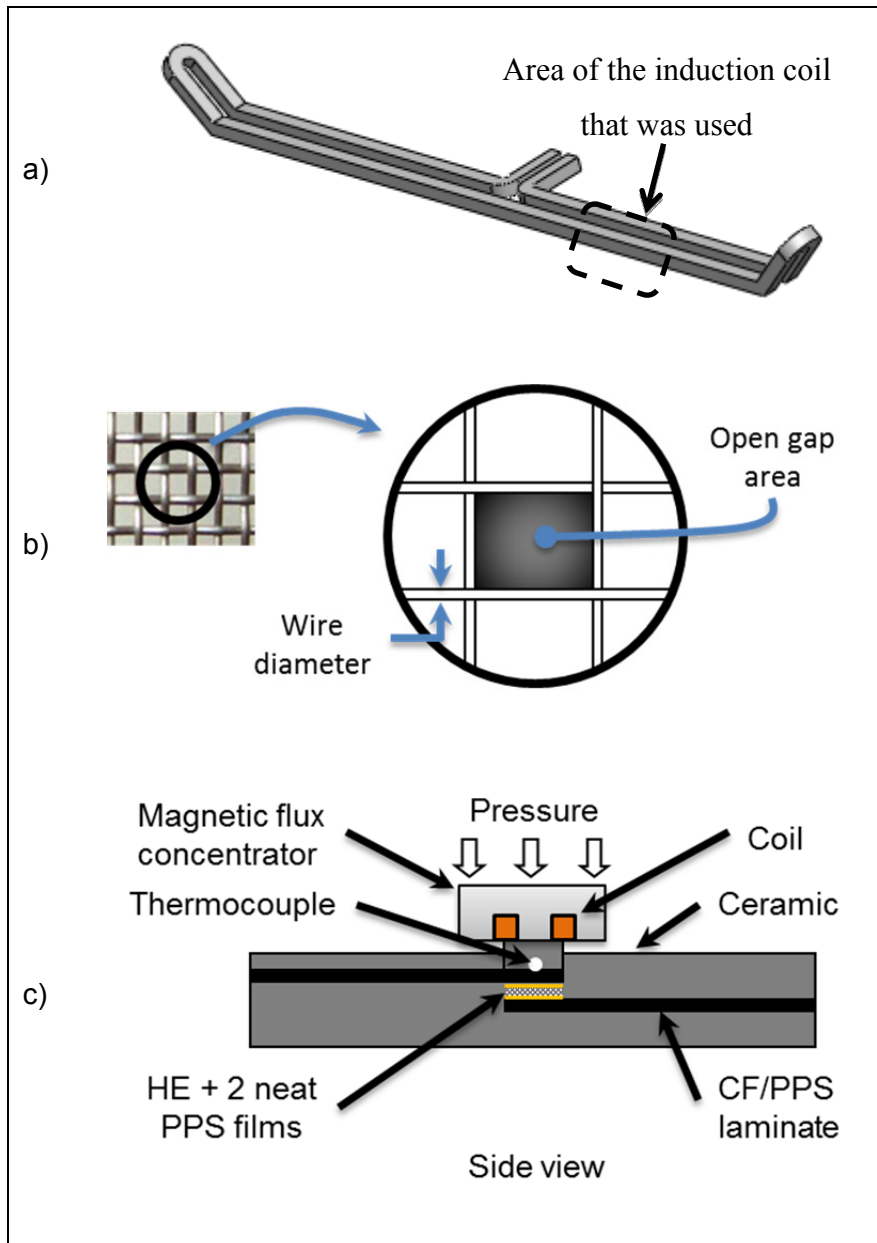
Induction heating: a) coil geometry b) heating element geometry and c) induction welding setup
